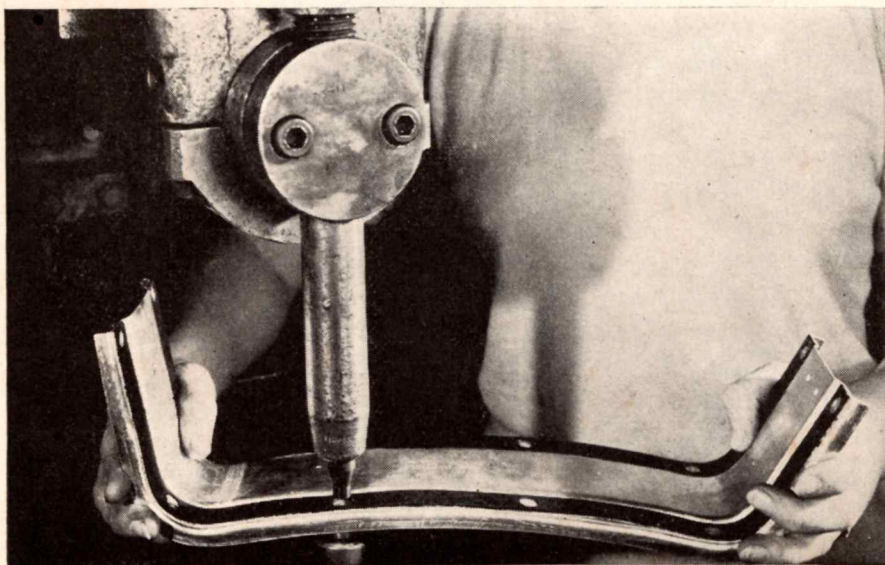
Spotwelding operation used to secure chafing strip to a part
